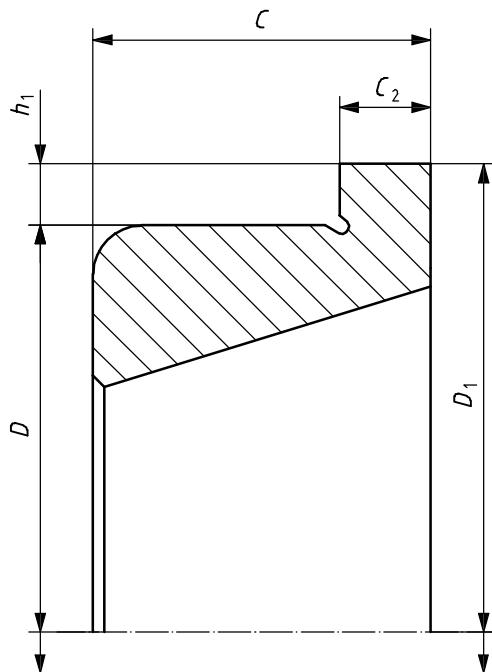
Single-row tapered roller bearing with flanged outer ring
